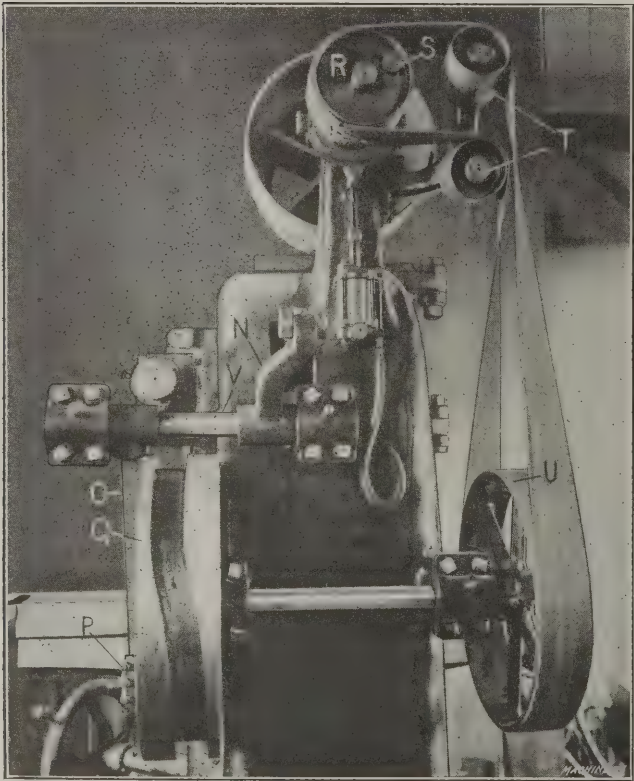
Rear View showing Drive for Cam-wheel and Compressed Air Pump
